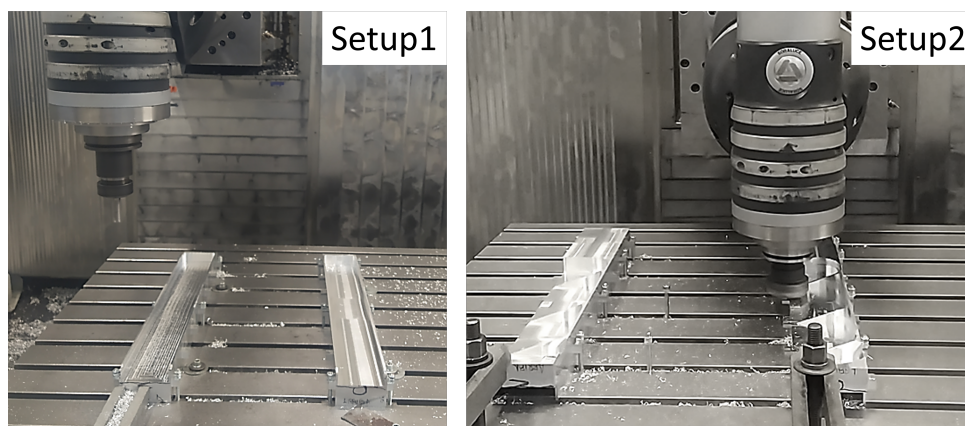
Machining of the two parts (*a* and *b*) in Setup 1, open pocket side, and Setup 2, triangle-ribbed side.
